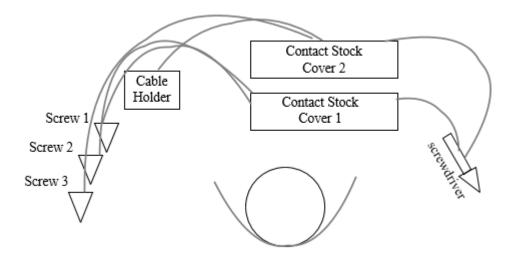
Operator Layout and Placement of Electric Plug Elements.
